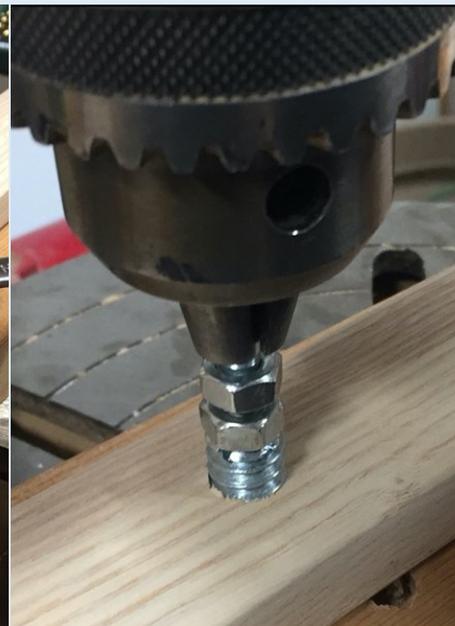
Drill Press Emplacement of Screw-In Insert in Runner
